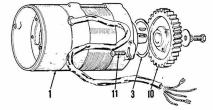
Exploded view of early ignition timer. Alternator (1) is available only as a complete unit.
